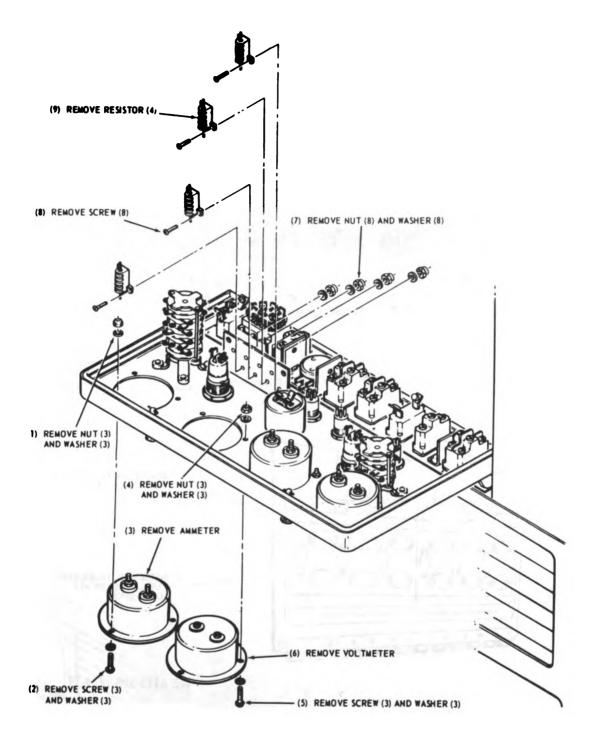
Electrical controls instruments panel assembly voltmeter, ammeter, and synchronizing light resistors, removal and installation.
